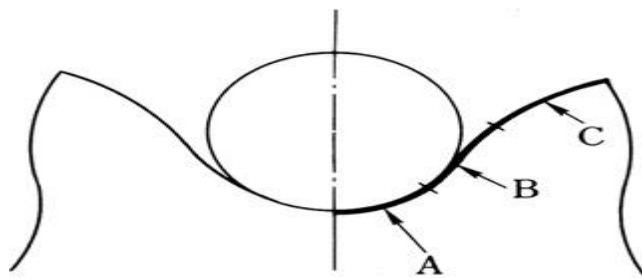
Sprocket Tooth Shape and Positions of Engagement
